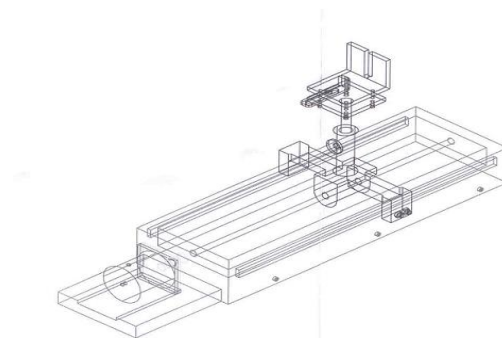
Three Dimensional Technical drawing for the opto-mechanical system designed in 2005, isometric view of the system
